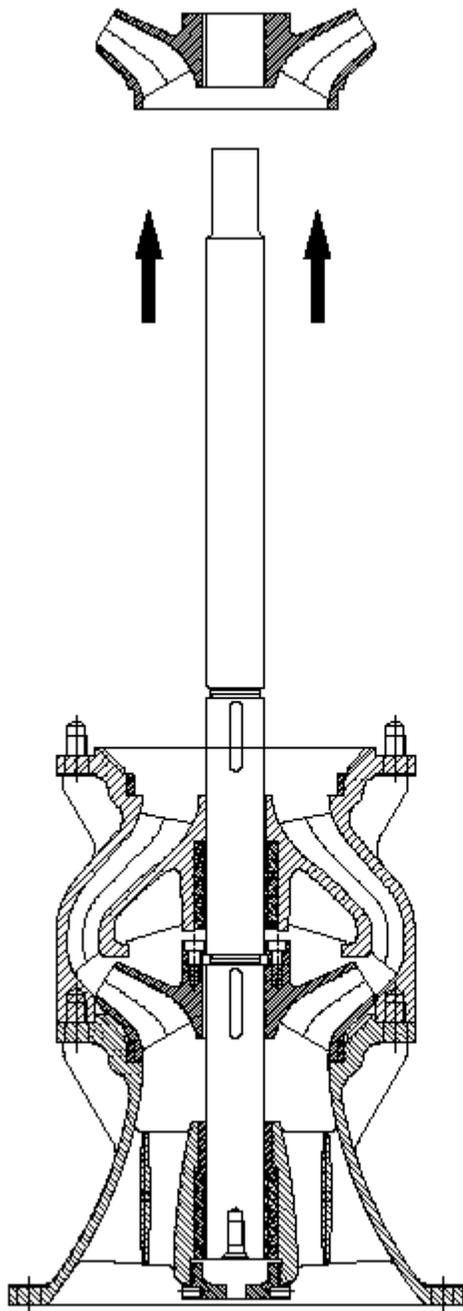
DIS ASSEMBLY OF BOWL ASSEMBLY
